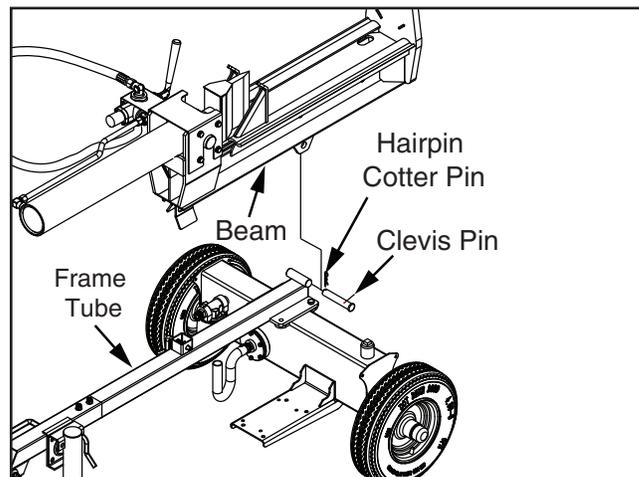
Attaching hydraulic cylinder and beam to frame tube.
